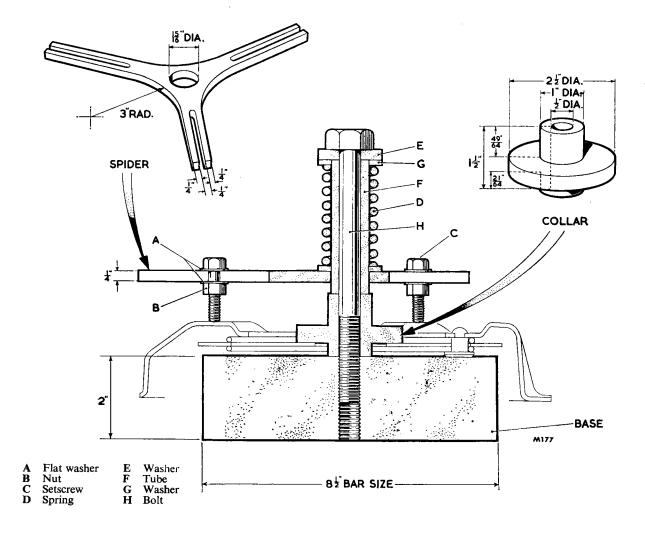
Dimension of special tool for compressing the diaphragm spring when rivetting the spring to cover pressing.
